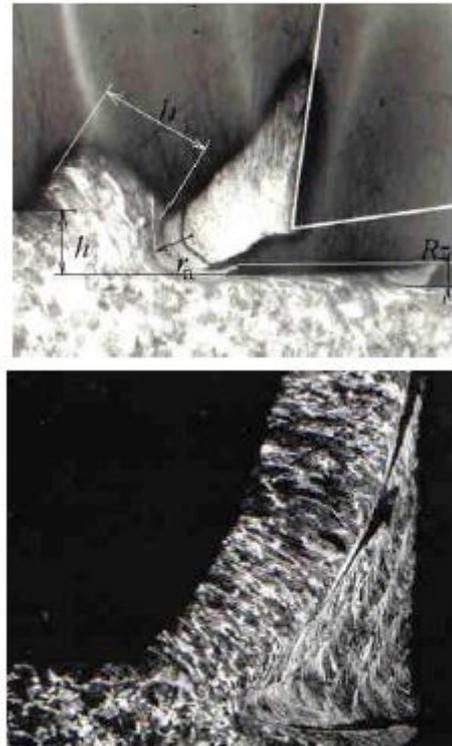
The typical shape of augmentation on a cutting wedge during finishing. Workpiece: steel C45, tool: P20, f = 0,05 mm, $v_c = 30 \text{ m.min}^{-1}$, h-chip thickness, r_n – radius of augmentation edge Rz – surface roughness
